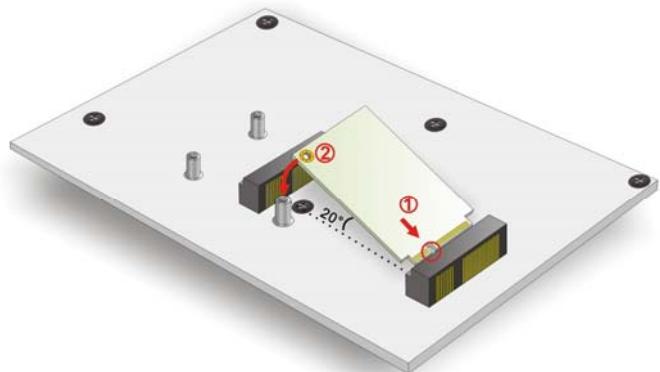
Insert the Full-size PCIe Mini Card into the Socket at an Angle
